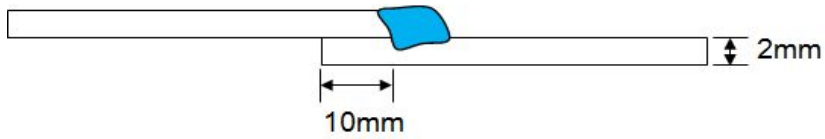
Dimensions of MAG welding specimen
